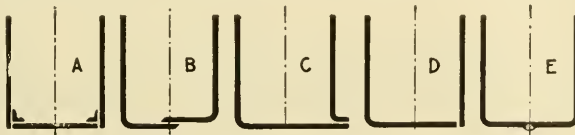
VARIOUS METHODS OF BOILER SEAM WELDING
